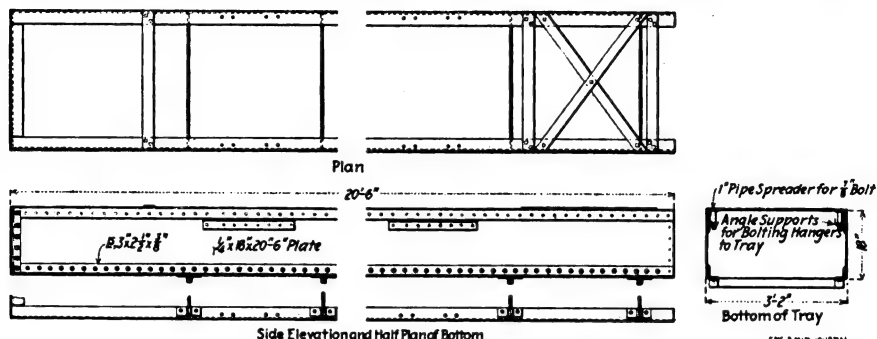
HANCOCK JIG AND STEEL SUPPORT USED IN DOE RUN NO. 3 MILL.
